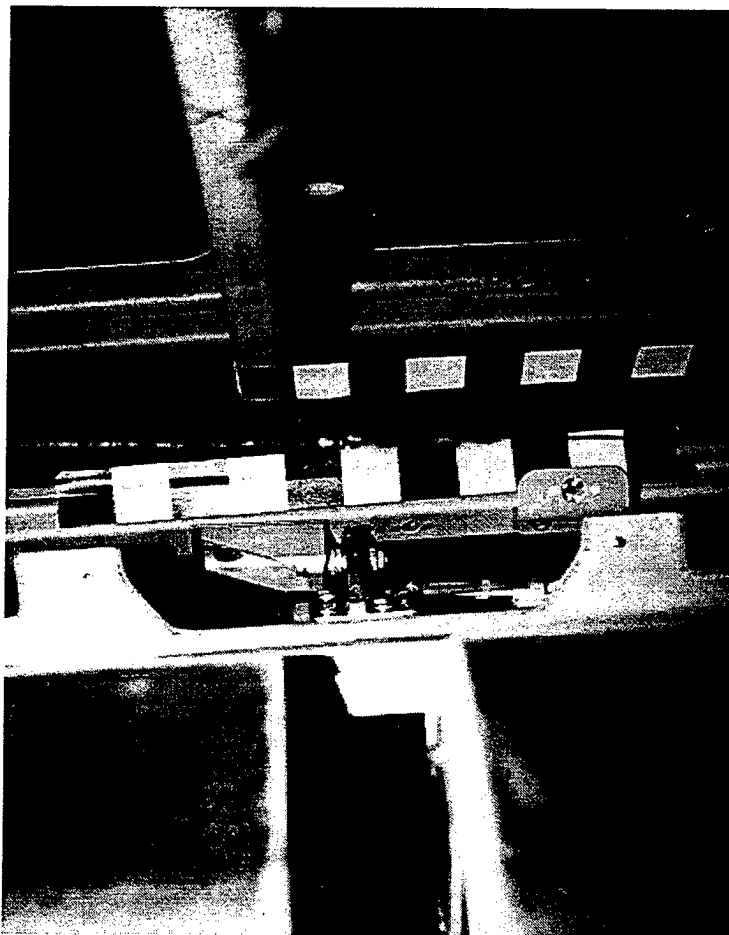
PRETEST BIN A MID UPPER ATTACHMENT SUPPORT NO. 76 VIEW
